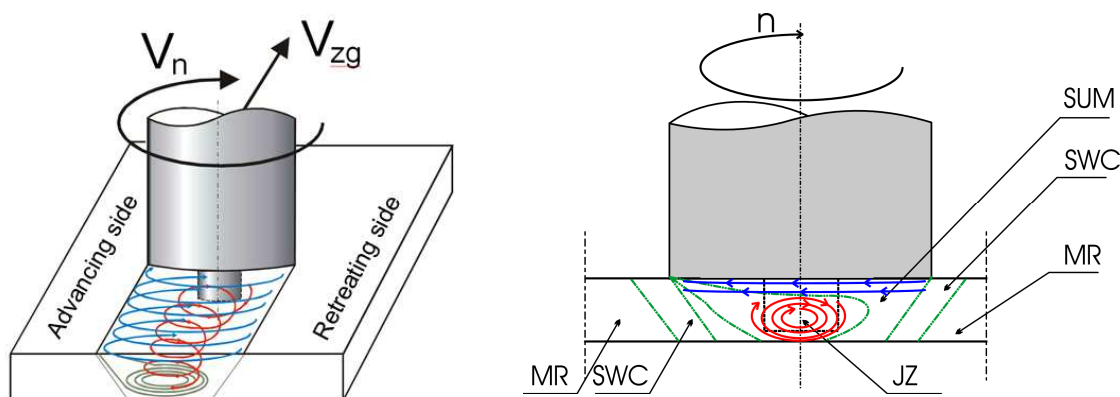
The principle of the FSW process [2]: V_n - rotational speed of the tool, V_{zg} - welding speed, JZ – the nugget, MR - base material, SWC - heat affected zone, SUM - thermo- mechanical affected zone
